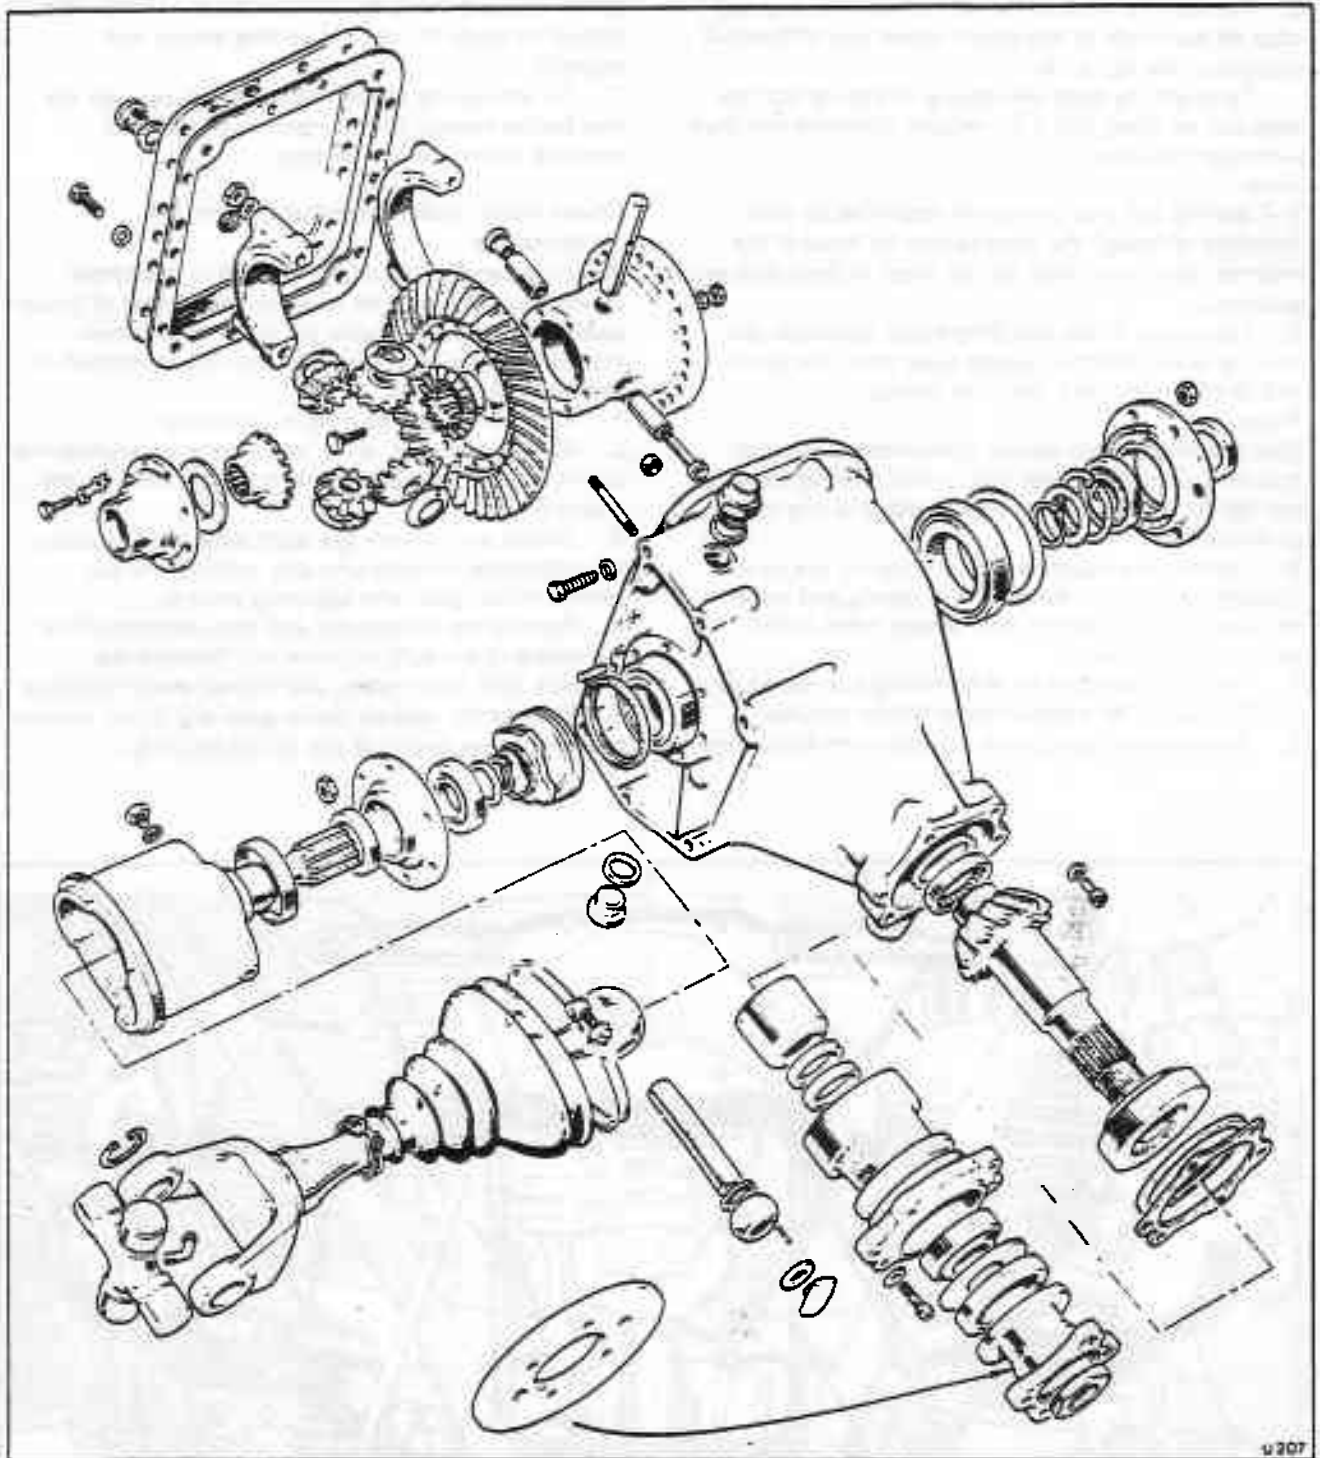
Final drive (cars fitted with ball and trunion joints)
